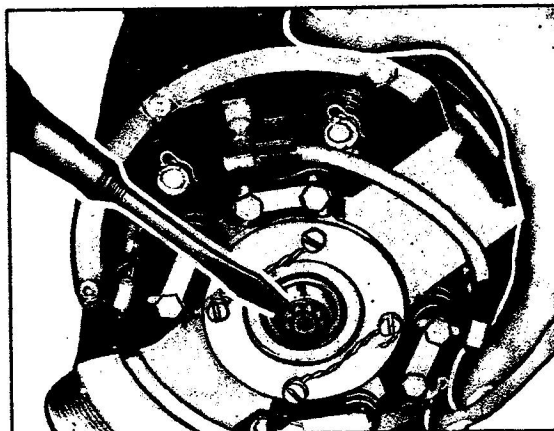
Removal of Pencil Drive Shaft Lock Ring
